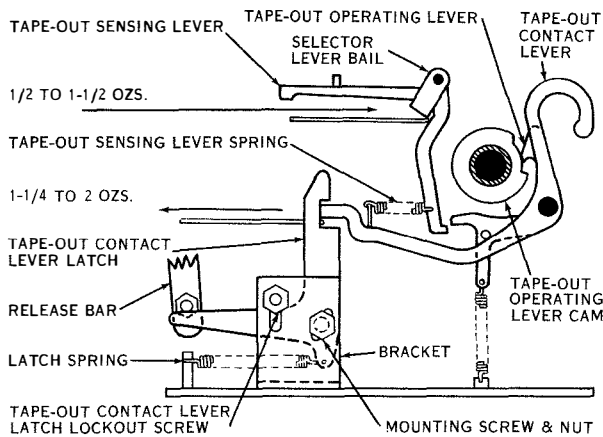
Tape-out Contact Lever Latch and Sensing Lever Spring Tensions
